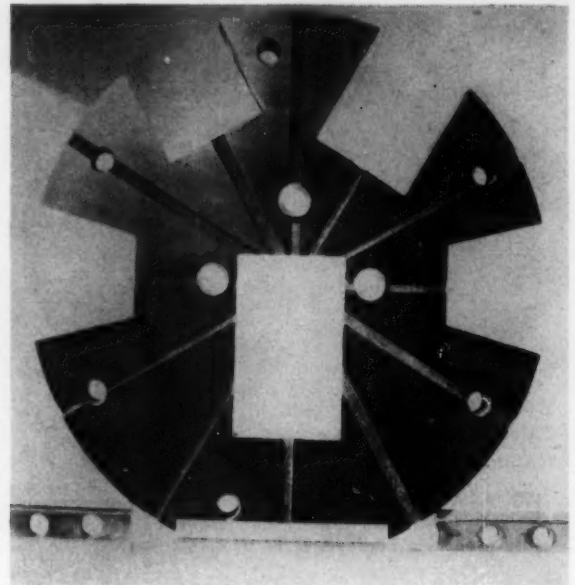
Gage for checking automobile ring gears after heat treatment. Use of Air-Wear steel considerably reduced wear and extended the life of the gage.
